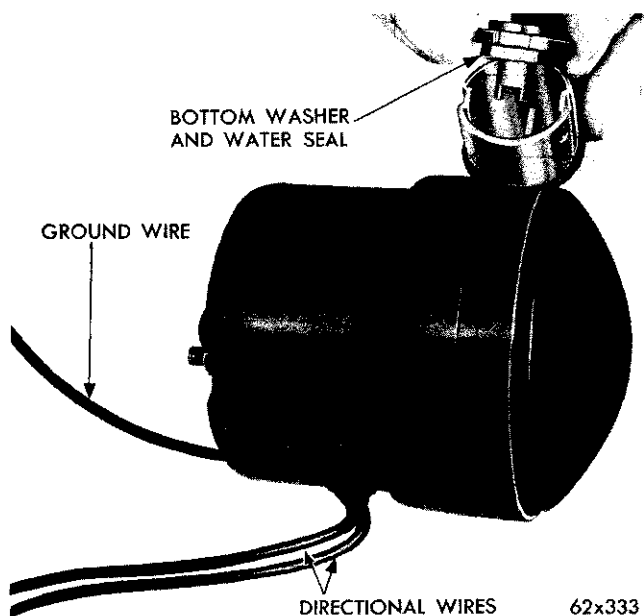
Removing Bottom Insulator and Water Seal Washer
